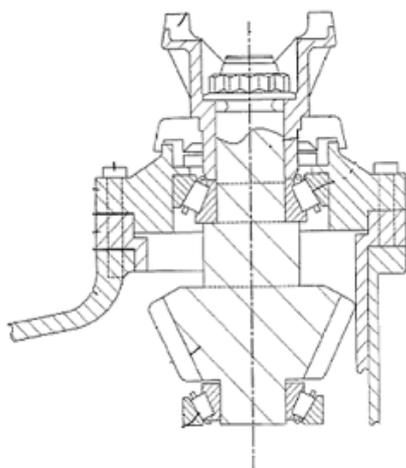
Pinion bearings in an X- Configuration. The support bearing is no longer necessary.
